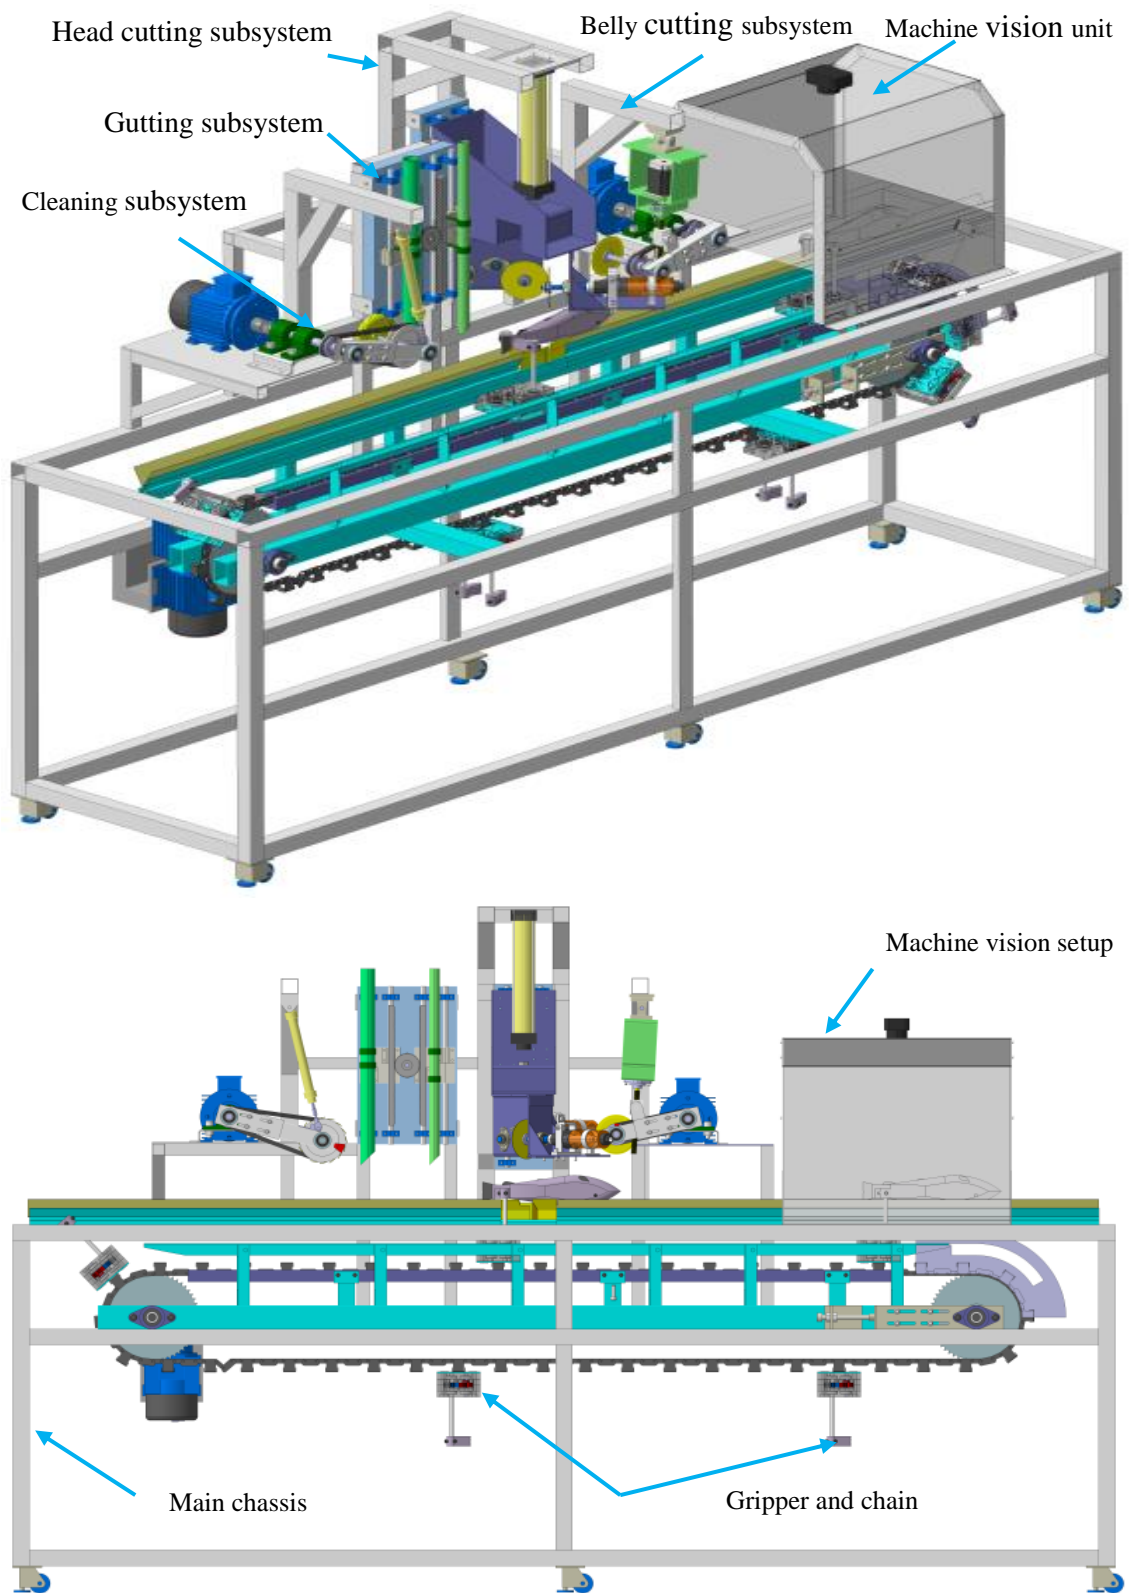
The complete design of the trout processing machine: a) isometric view, and b) front view.
